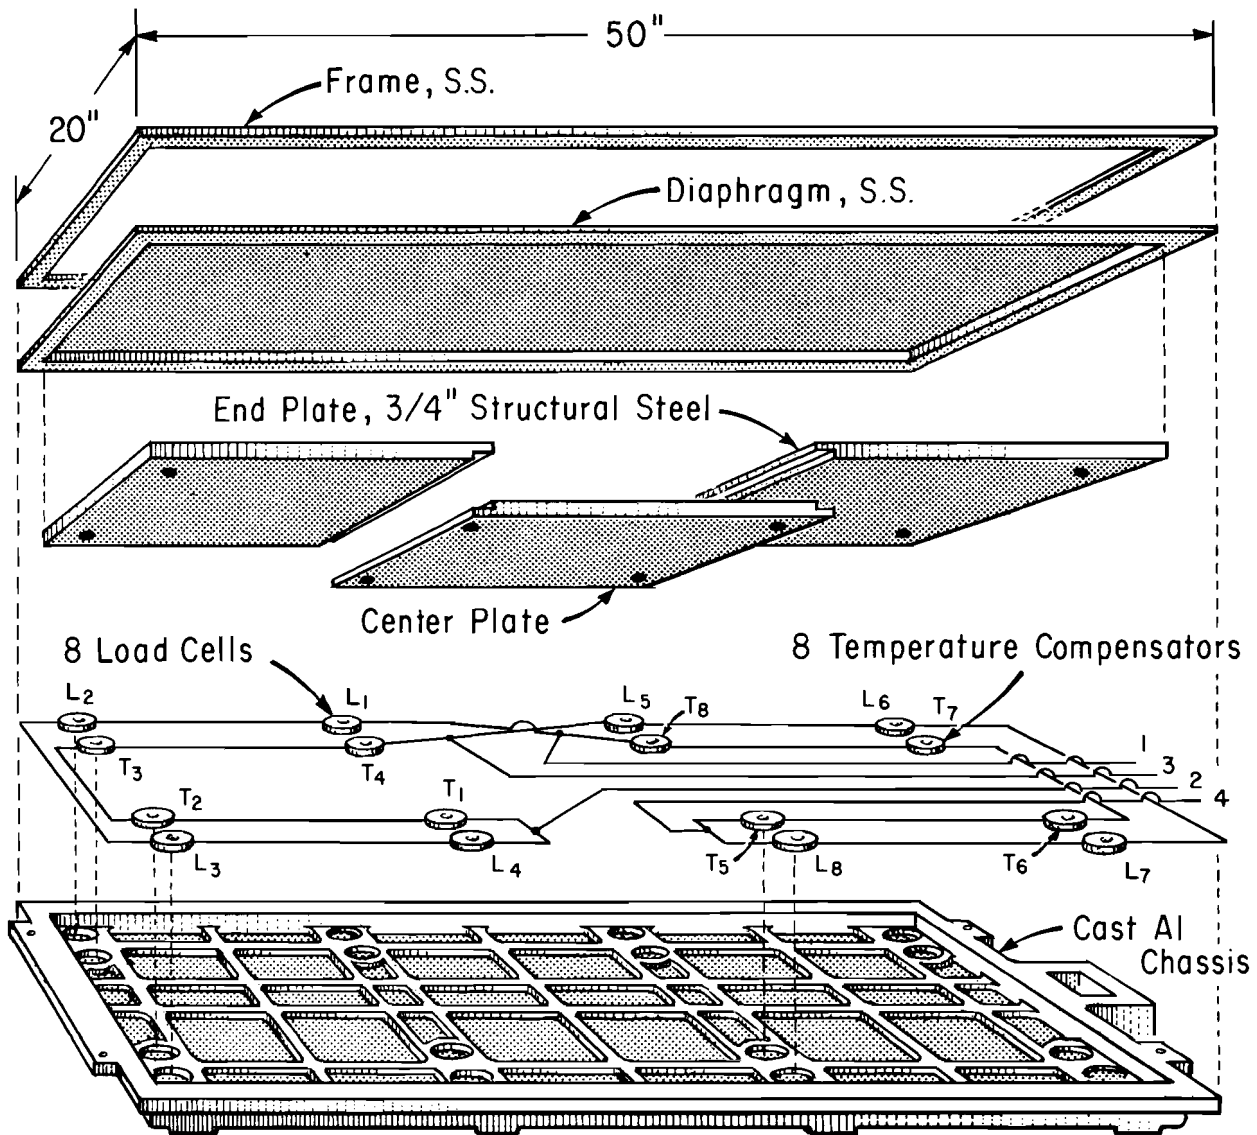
Exploded view of modified transducer with cast aluminum chassis.
